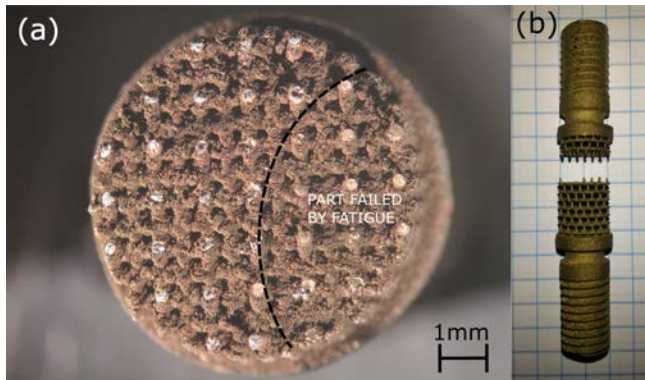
(a) Fractured section of a fatigue testes specimen (as built CUB S). The cell walls failed by fatigue (in the area indicated as “part failed by fatigue”) are golden because of the heat tinting. (b) Fractured specimen after a fatigue test. The fracture is away from the bulk/cellular interface.
